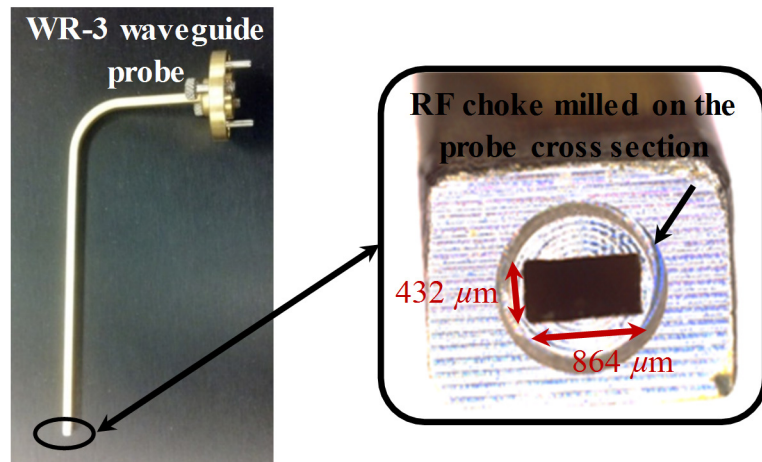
Choke milled on the cross-section of waveguide probe using the EDM technique.
